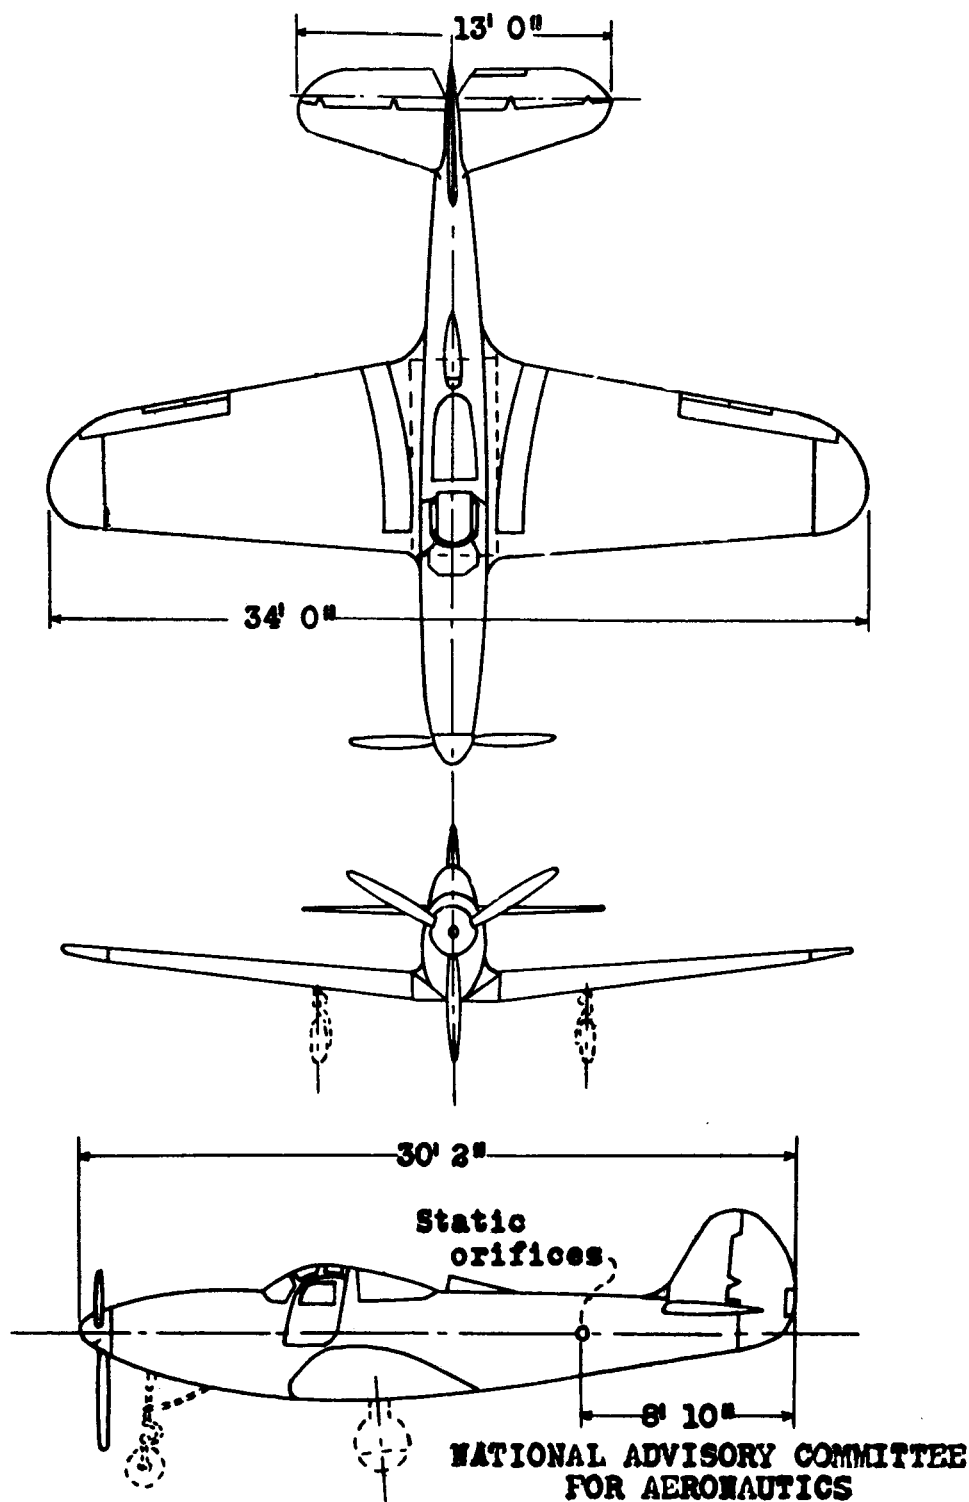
Three-view drawing of the Bell P-39N-1 airplane.
